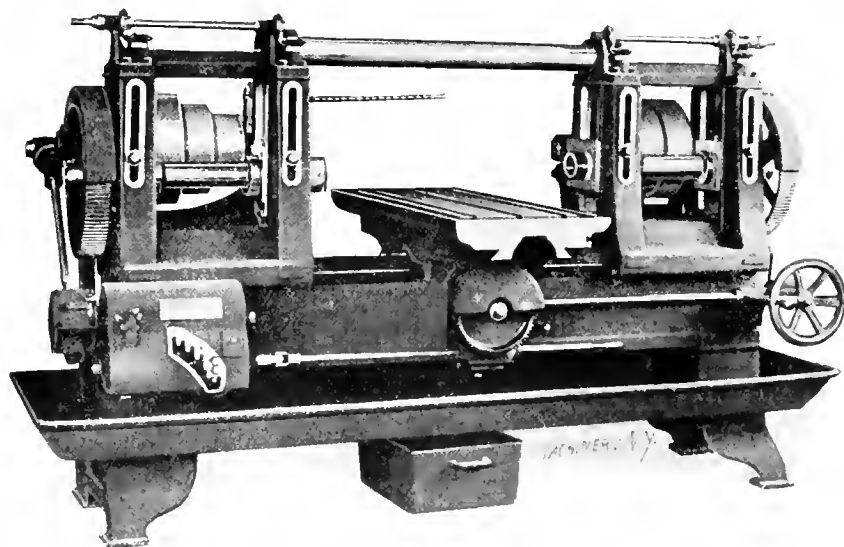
Double-head Lincoln Milling Machine built by the Hendey Machine Co.
